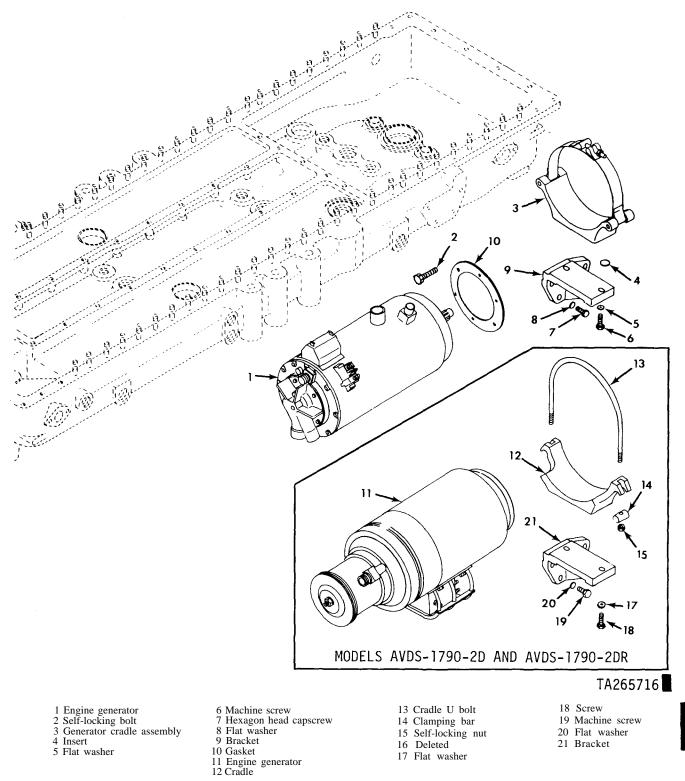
Engine generator, Cradle support and associated parts — exploded view.
